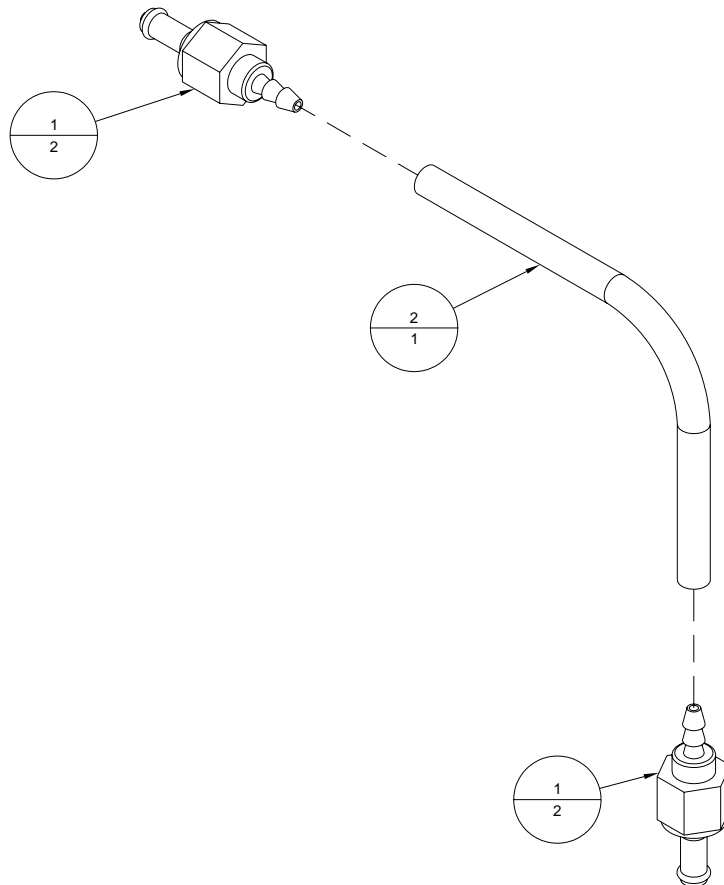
Ink/Exhaust line assembly (9102152A)
